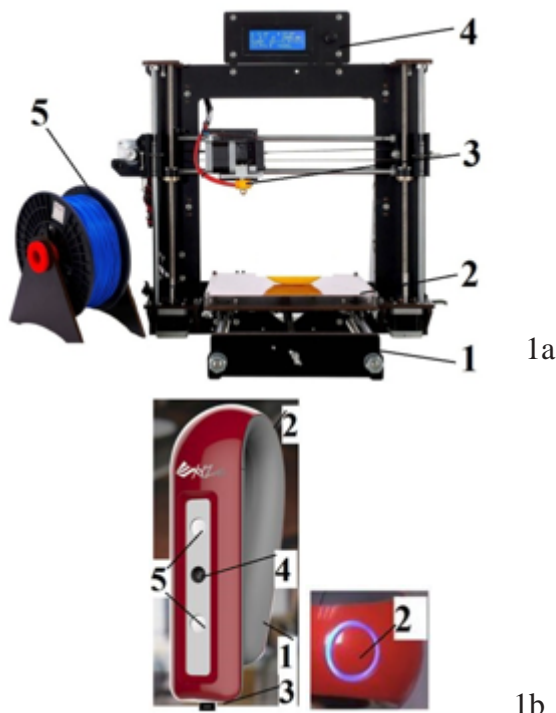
CTC DIY 3D PRINTER and XYZ printing 3D Scanner
